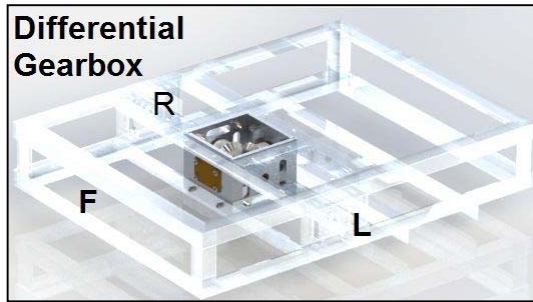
SolidWorks® render of the differential gearbox located inside of the chassis with the front, left, and right sides indicated. Note how the height of the chassis reflects the height of the gearbox.
